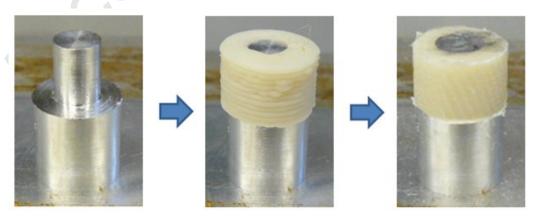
The stepped aluminum (left); the aluminum embedded in polymer before machining (middle) and after machining (right)
